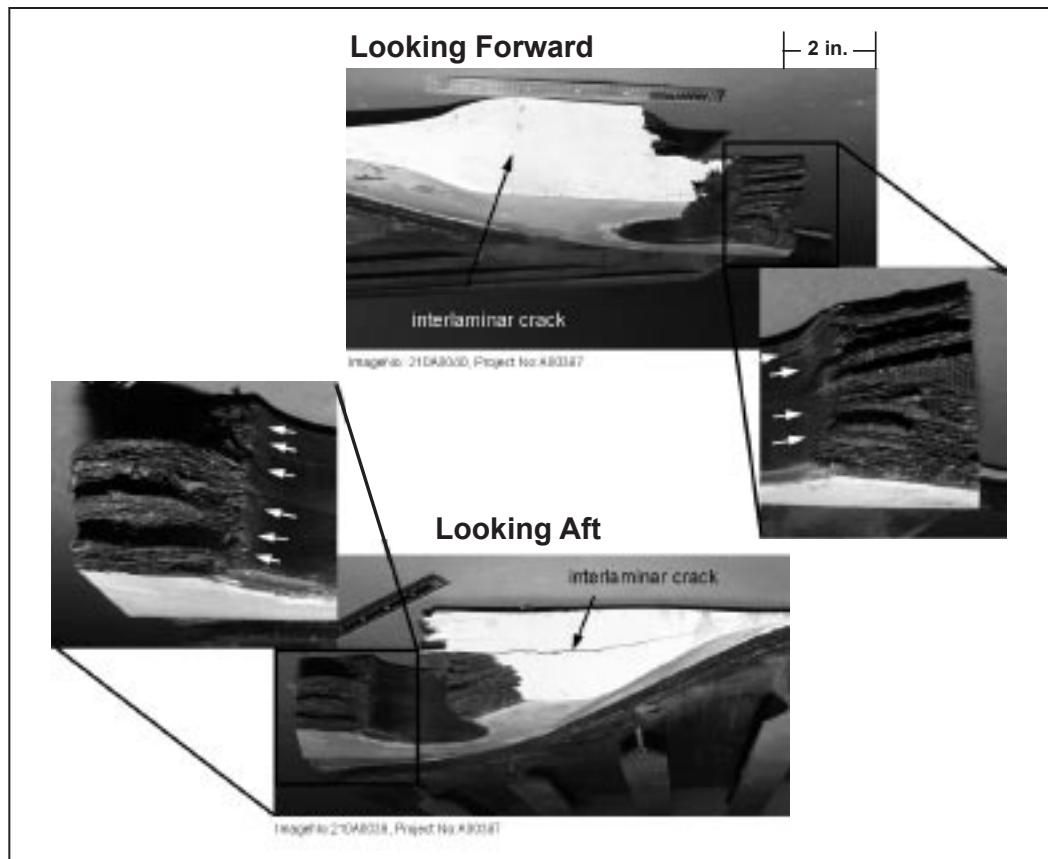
Right aft lug translaminar fractures (pictured from below the lug), which failed through the bolthole.
